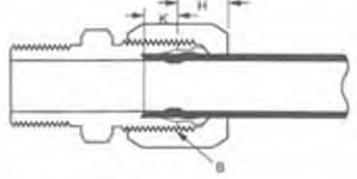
Examples of Mechanical Joints Pipe Unions
